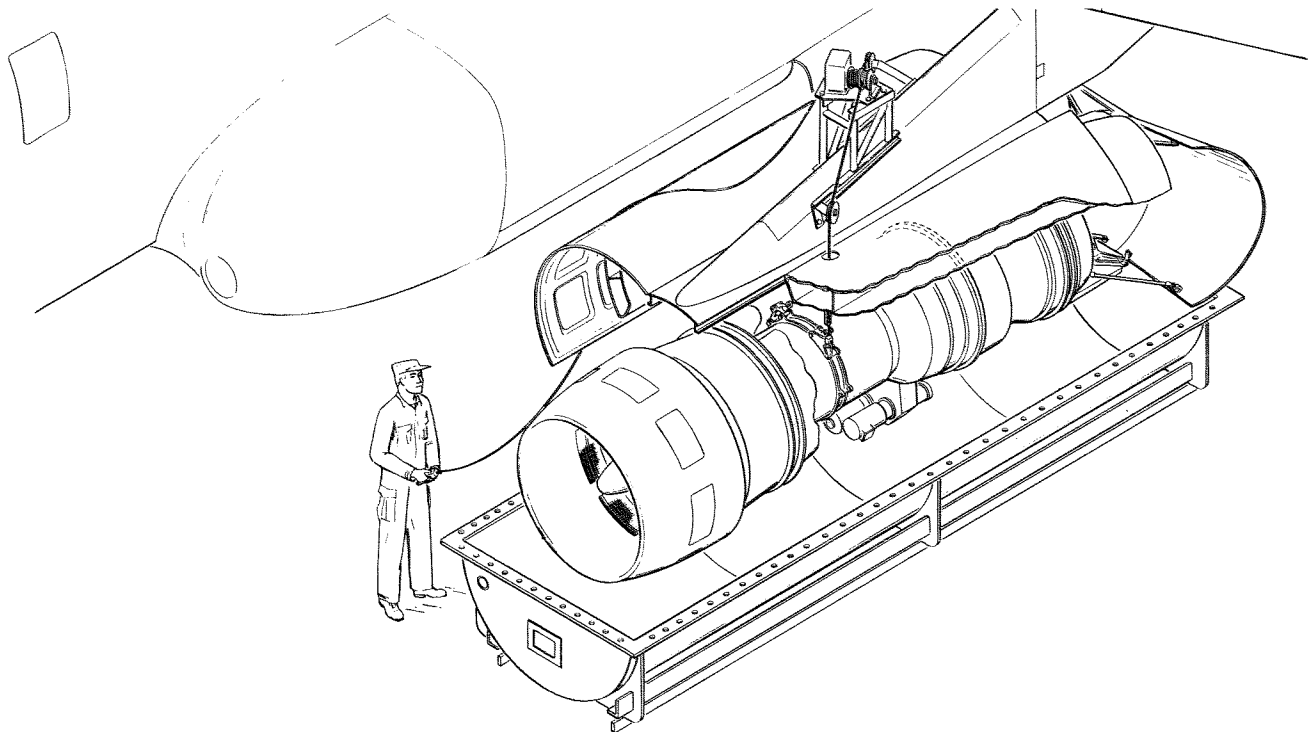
ENGINE REPLACEMENT—ADVANCED BASE EQUIPMENT.
